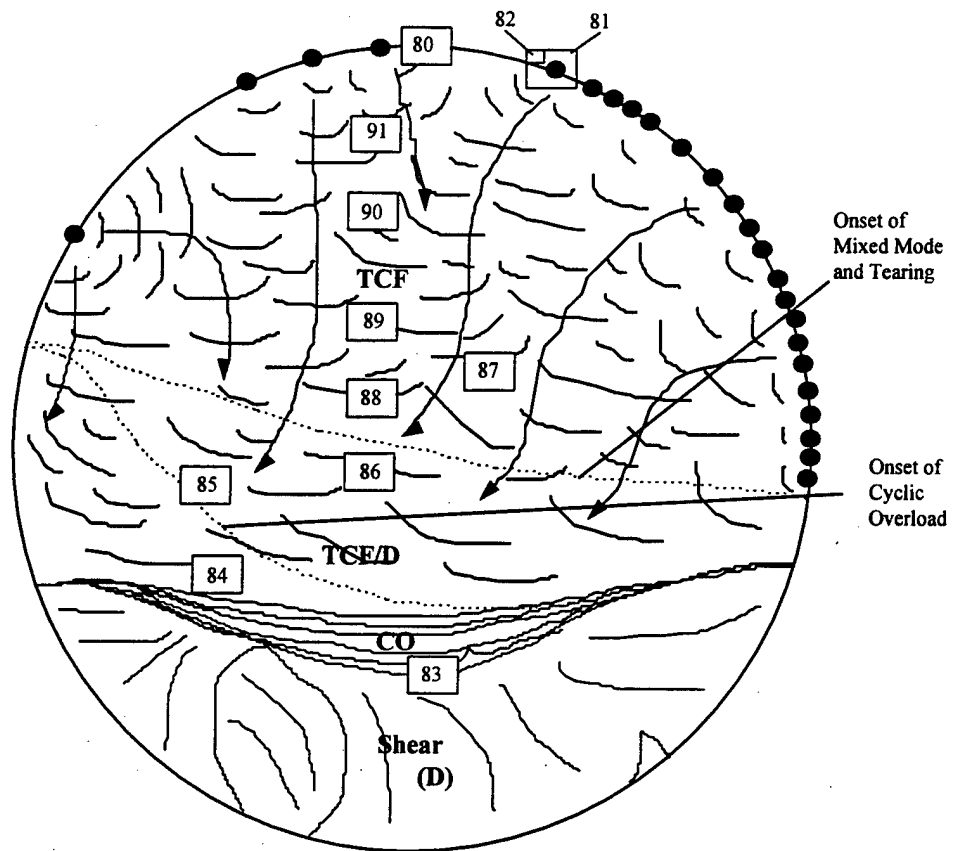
Schematic of the Fracture Surface of PUR Tie Rod -174.
